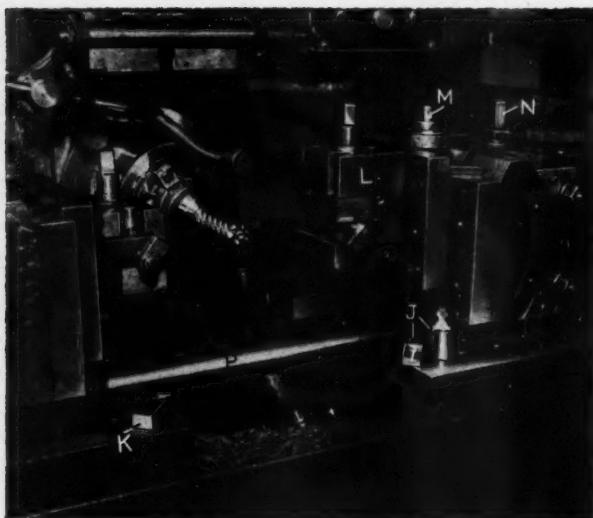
The concave surfaces of two blades are plunge-milled simultaneously on this Sundstrand machine
